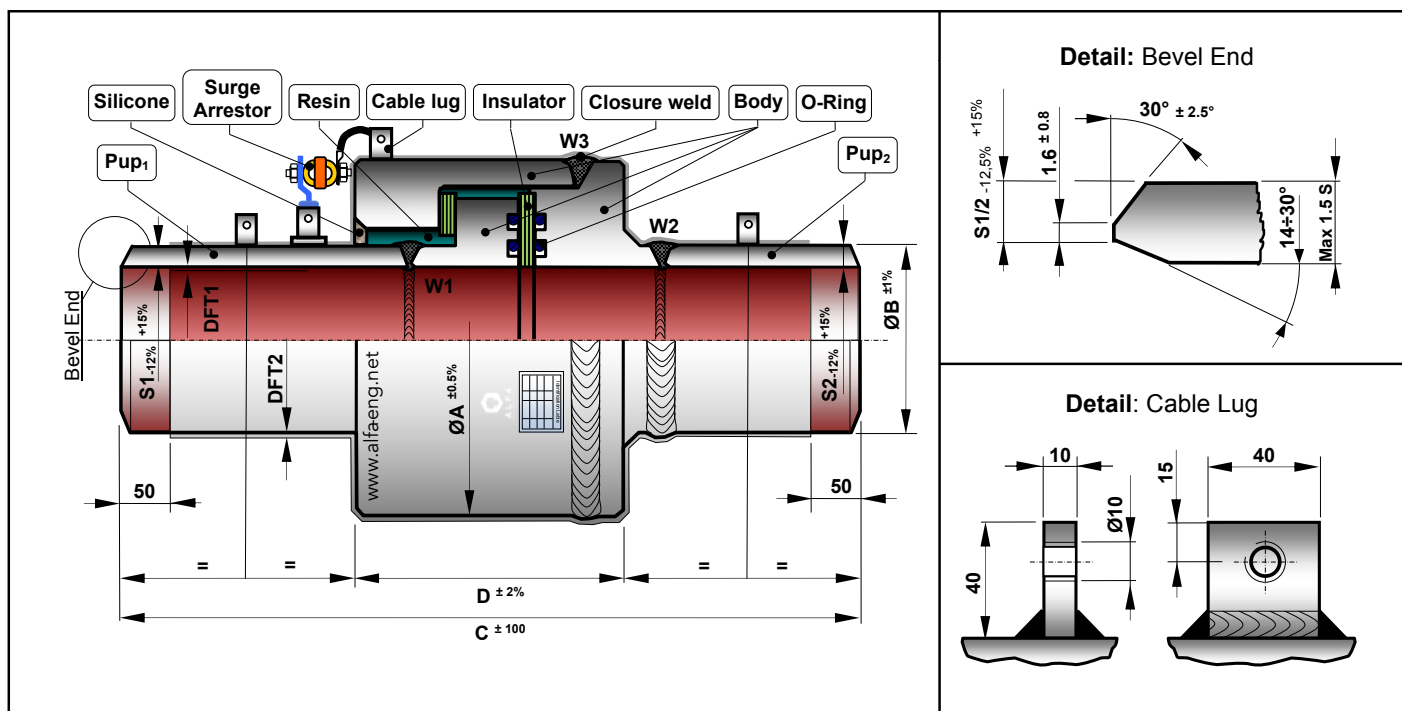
Alfa's standard model. Forged parts are kept together by closure weld W3; pup-pieces are connected to the body through butt welds W1 and W2
